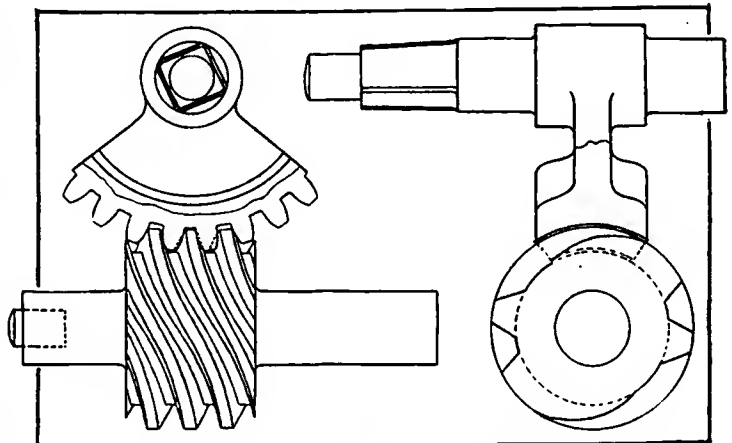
Example of worm and sector steering gearset, long used in good cars.
